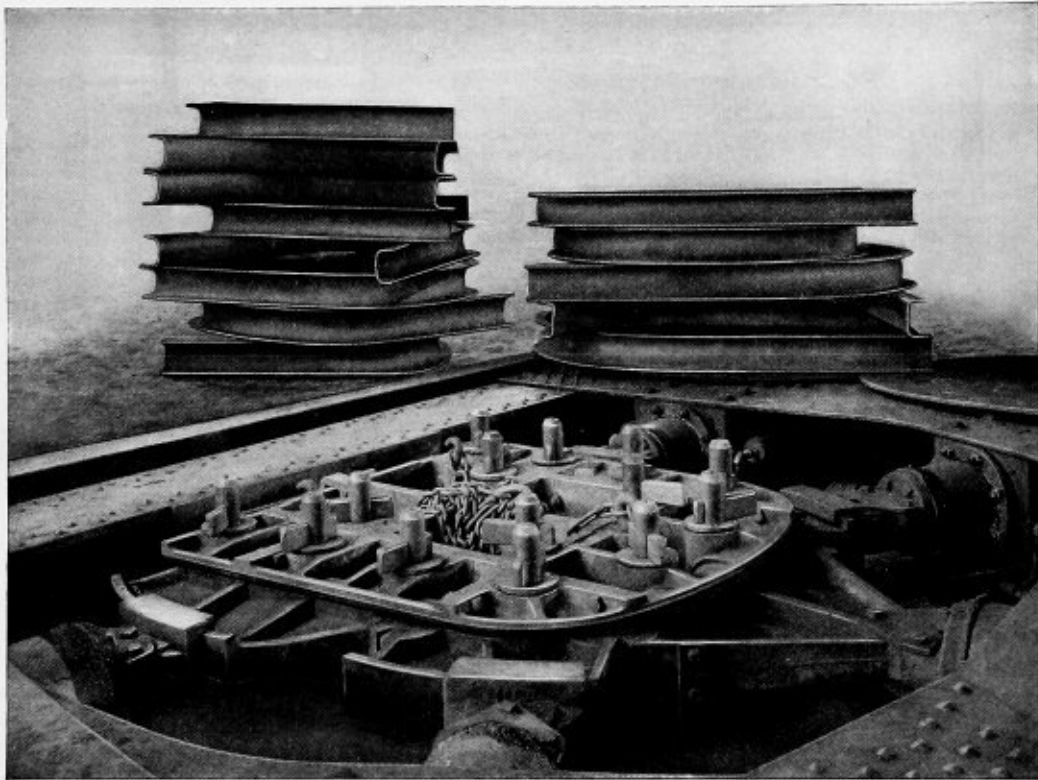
HORIZONTAL HYDRAULIC PRESS FOR FLANGING CHANNEL SECTIONS AT WORKS OF JACOES-SHUPERT U. S. FIREBOX CO.
